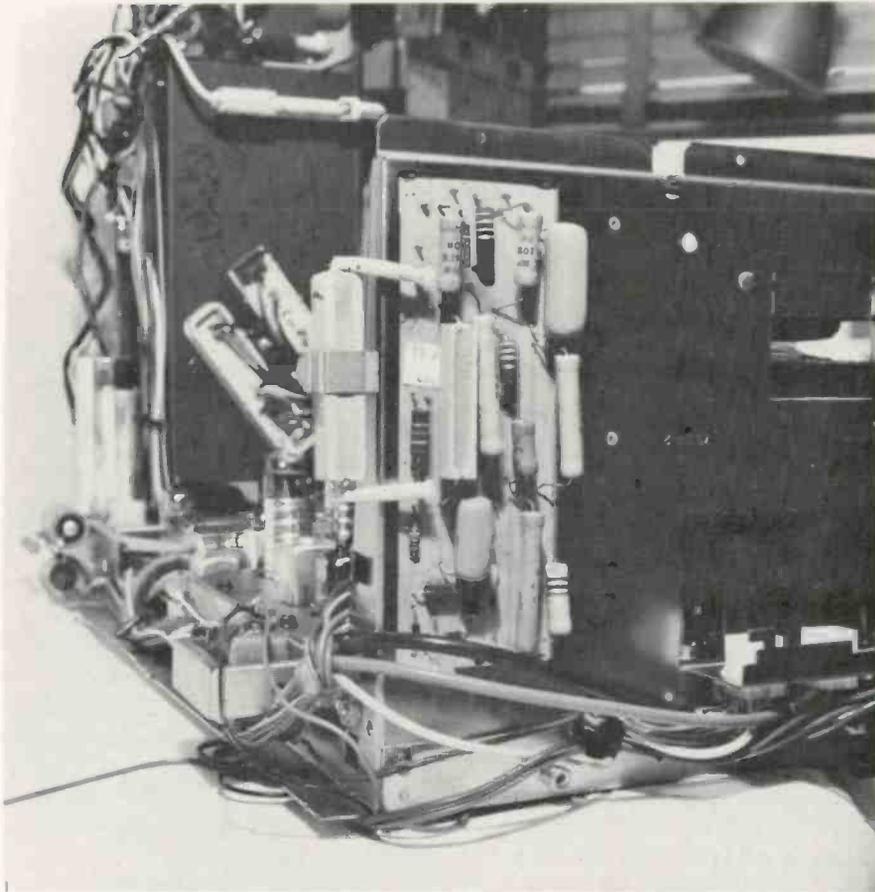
Power rectifiers and large wattage resistors are mounted on an up right panel making components more accessible and eliminating a number of terminal strips.
